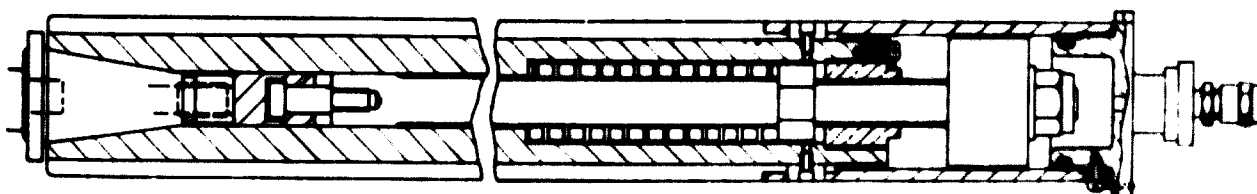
PATENTED TOOL CLAMPING AND HYDRAULIC RELEASE TO MAIN SPINDLE.
